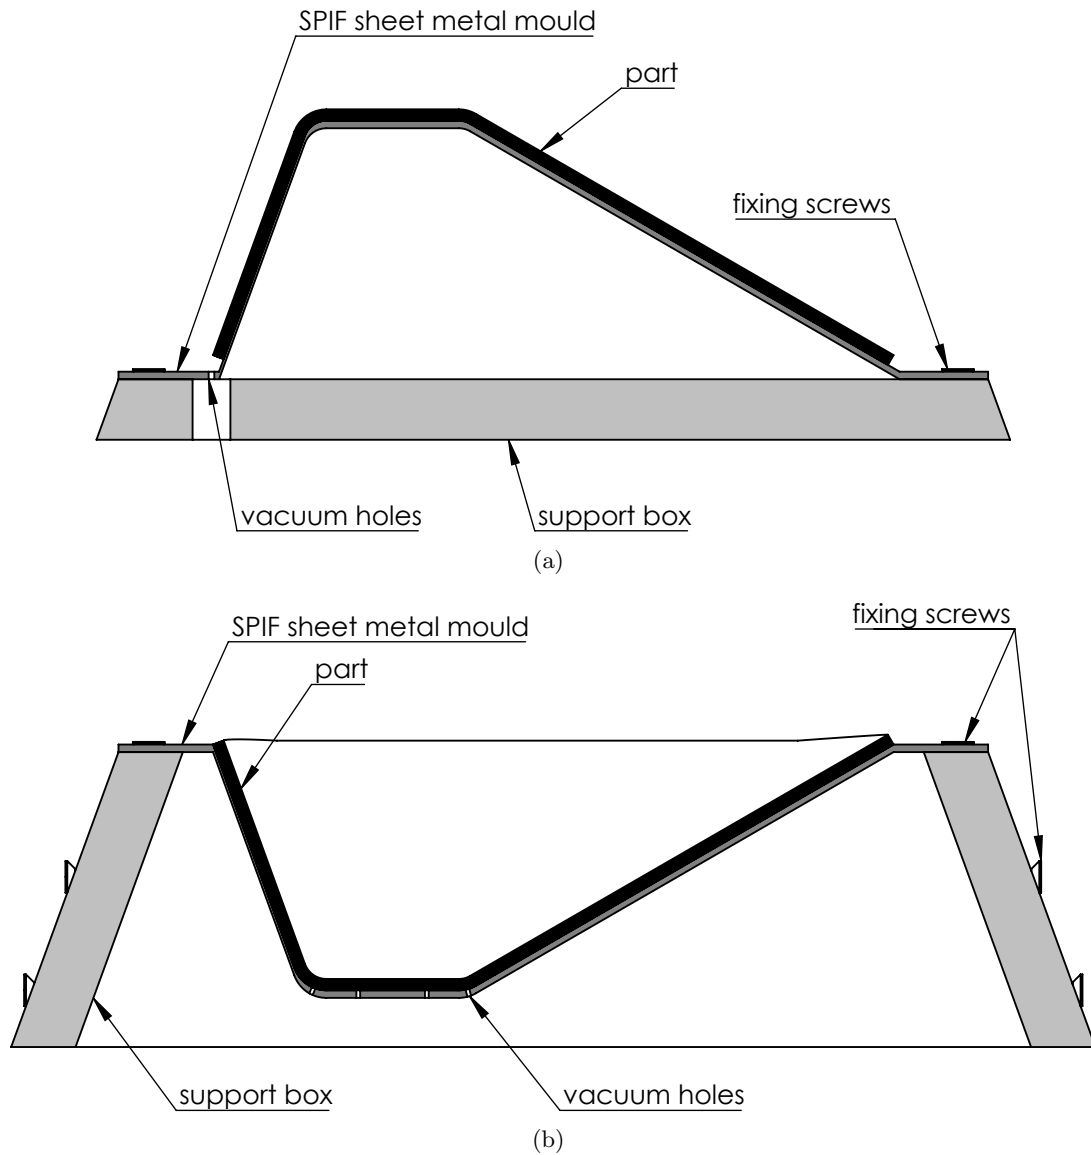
SPIF Thermoforming mould concept: (a) positive mould, (b) negative mould
